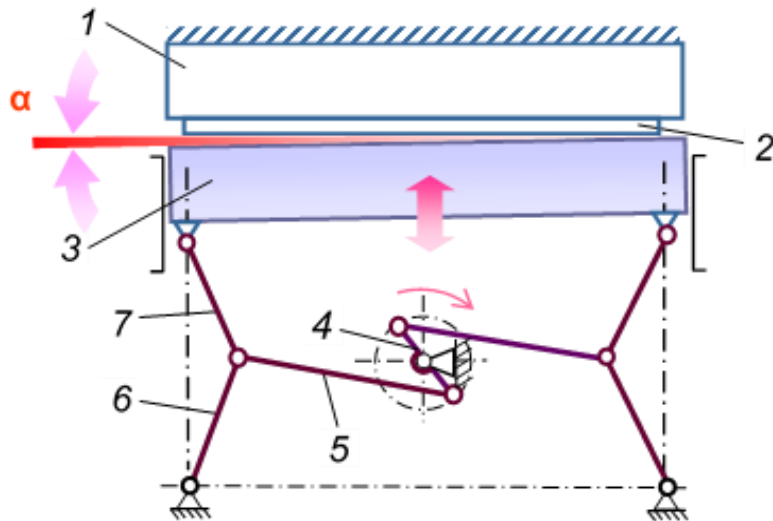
Scheme of combined lever wedge out mechanism of pressure plate drive in die-cutting press
